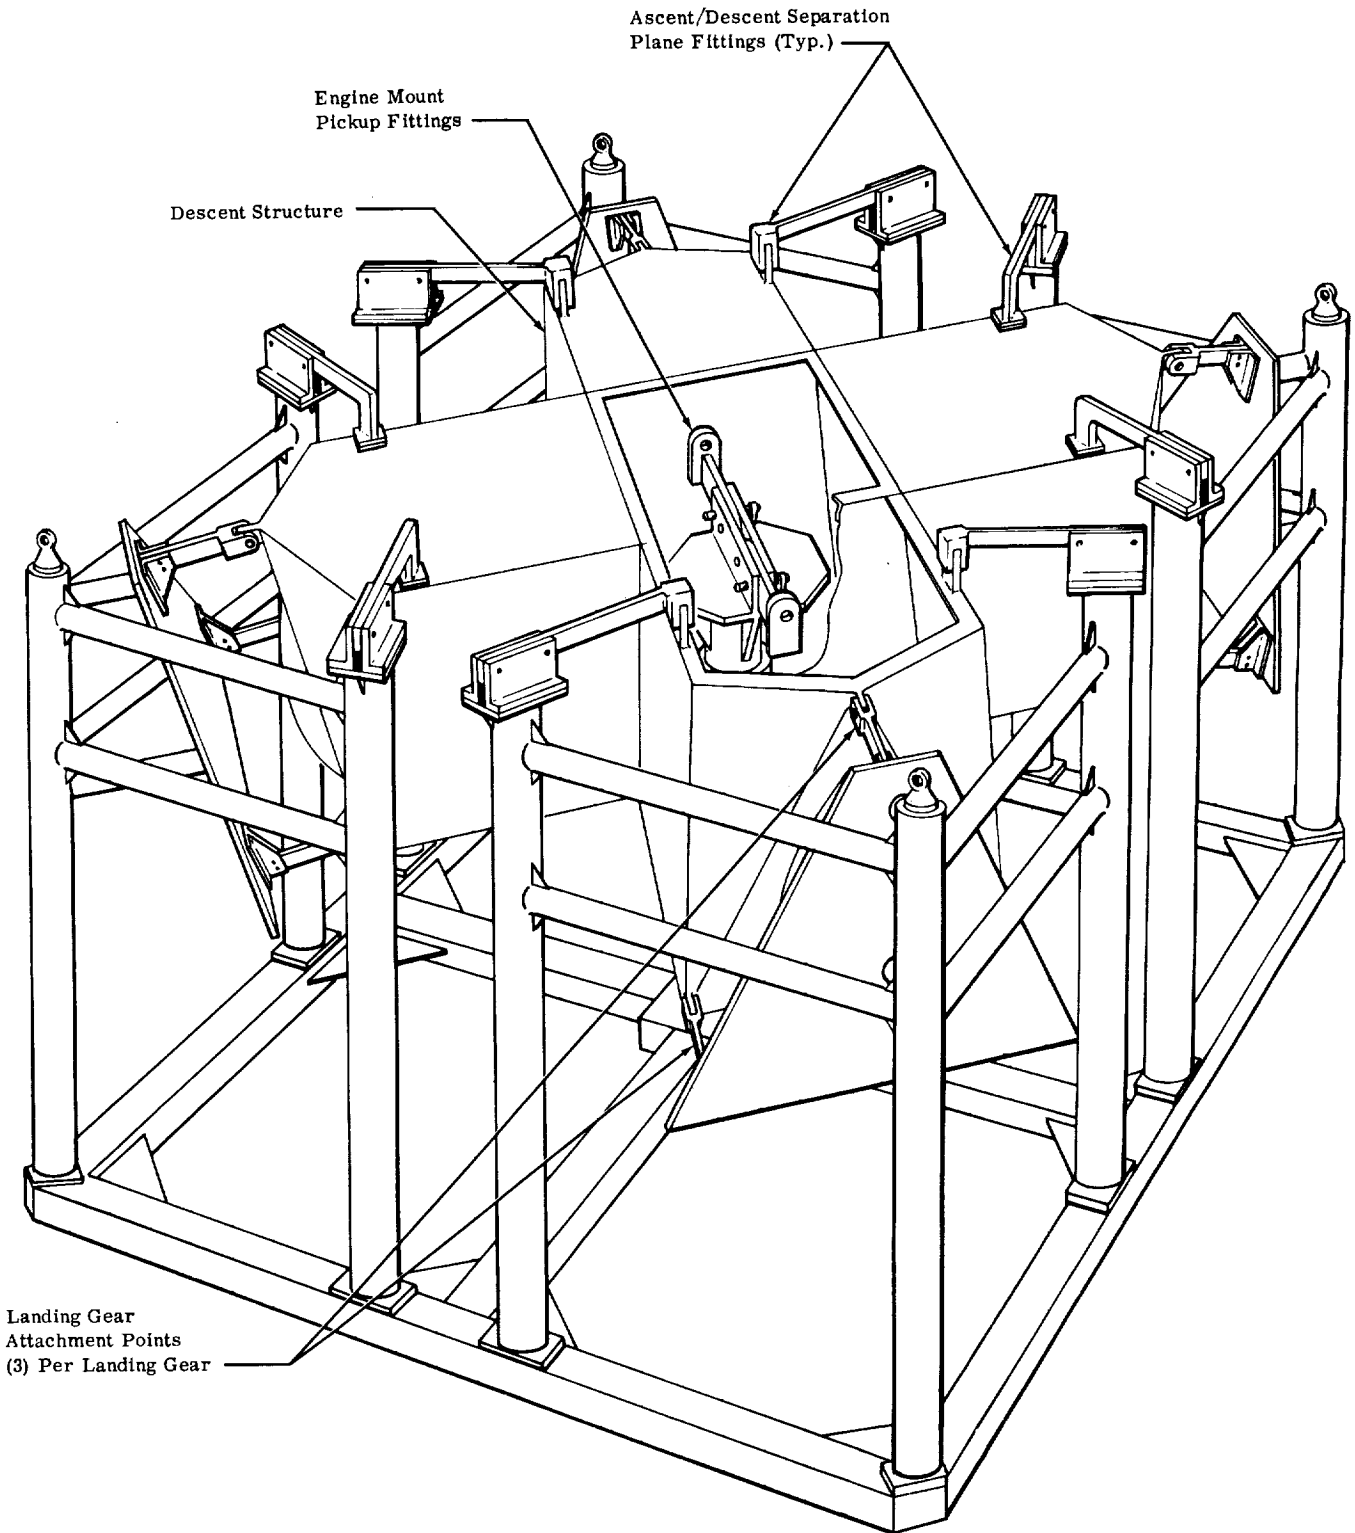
Final Structural Assembly Fixture - Descent Stage
